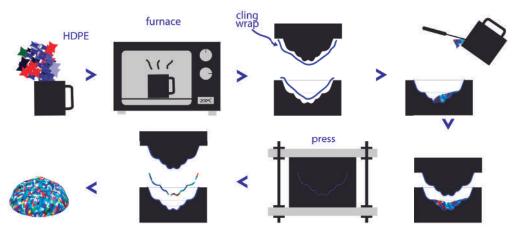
Plaster casting moulding process: 1st experience - mould coated with cling wrap
